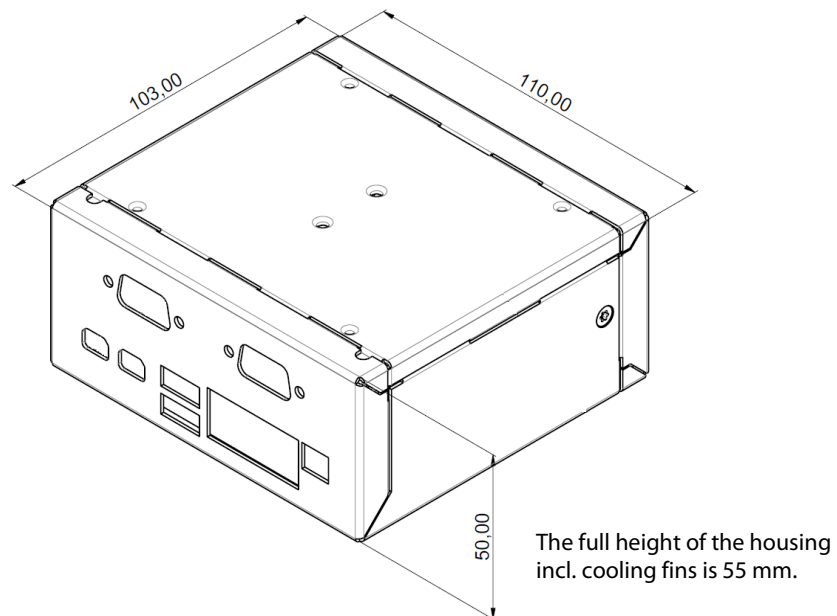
MBox-VH-E39 (with D-Sub-9 Connectors), Dimensions (mm), Bottom View
